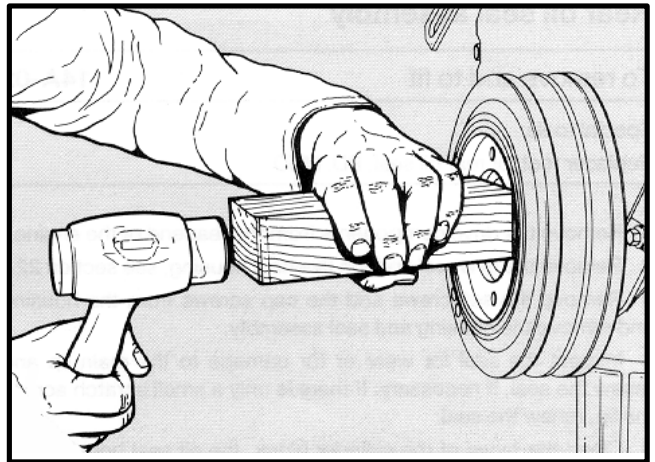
CRANKSHAFT PULLEY INSTALLATION, ENGINES YA AND YB
